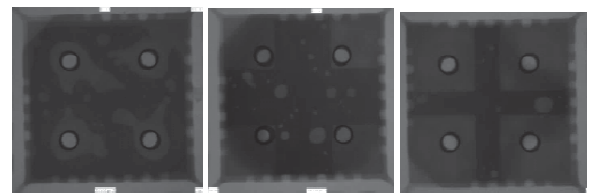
X-ray inspection for solder interface between PCB and the QFN test-device (exposed pad) of three configurations of voids area in solder interface (10%, 40% and 70%)
